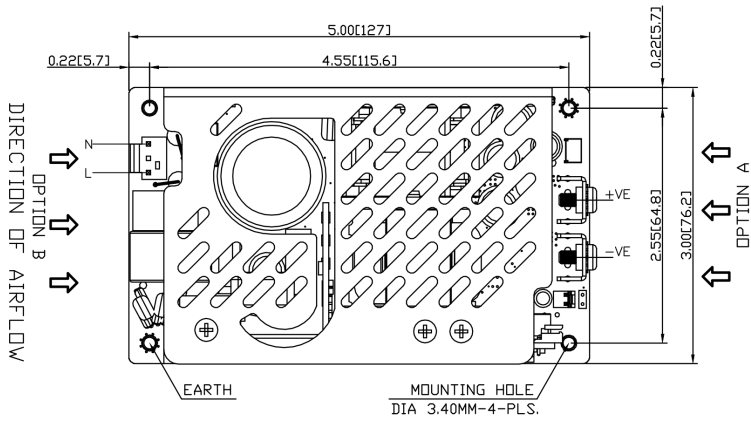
Mechanical Drawing – EPG500-1XXX Without Multi card
